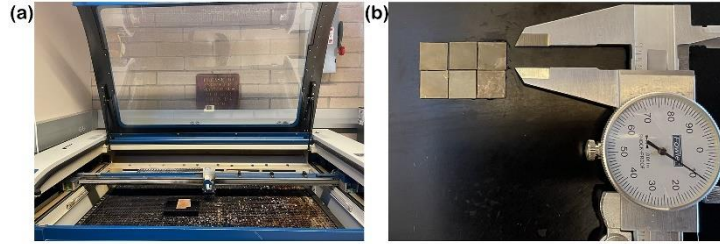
1- a) Fusion M2 40 laser cutter and samples b) Samples thickness measuring using dial caliper.
